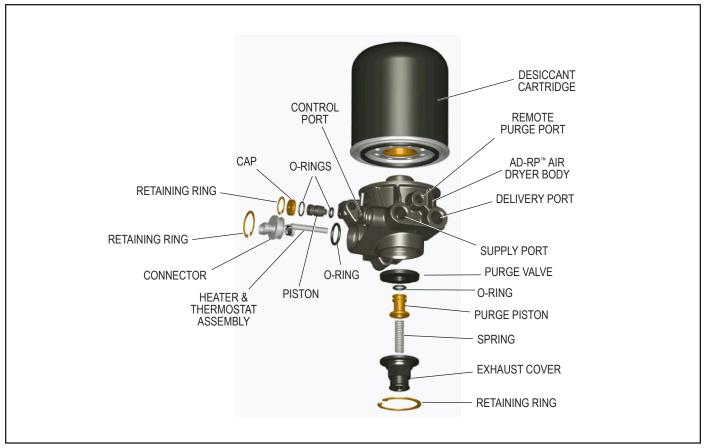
BENDIX® AD-RP™ REMOTE PURGE AIR DRYER EXPLODED VIEW
